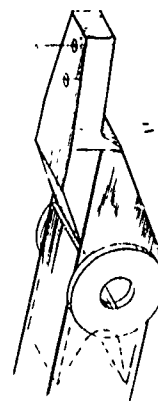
BORSIC-Aluminum Lower Side Brace Member (Proposed only -not fabricated)
